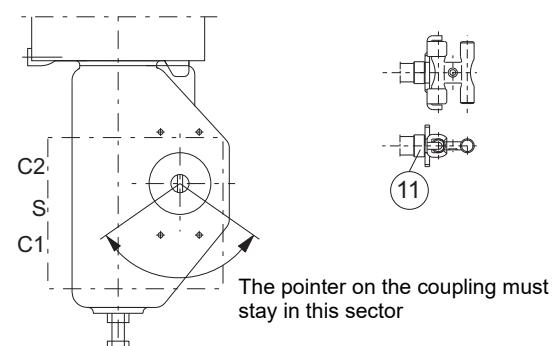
Mounting on Neles actuator with VDI/VDE mounting face
